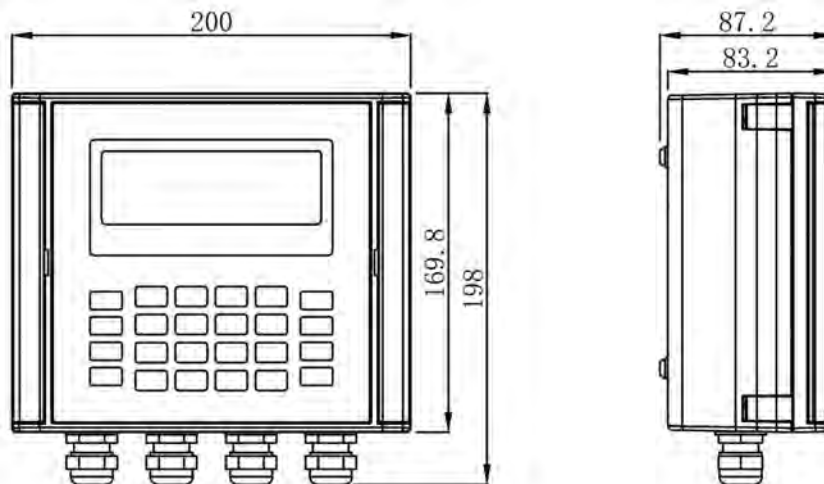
Host Overall Dimension Drawing (Unit: mm)
